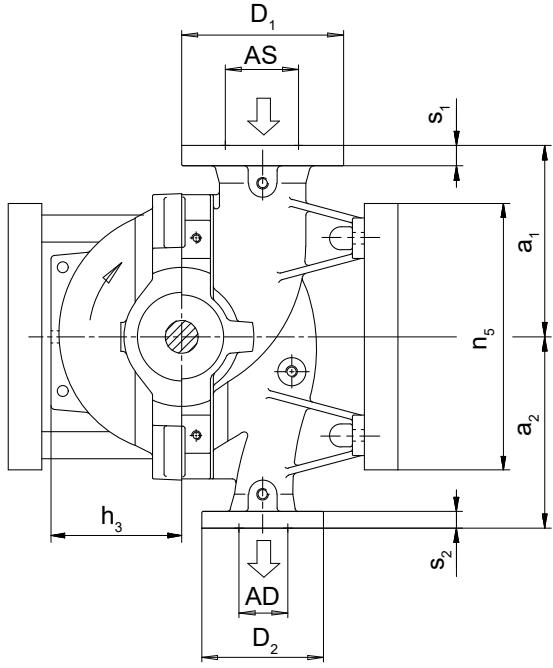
DK installation (4 foundations bolts), dimensions in [mm]
